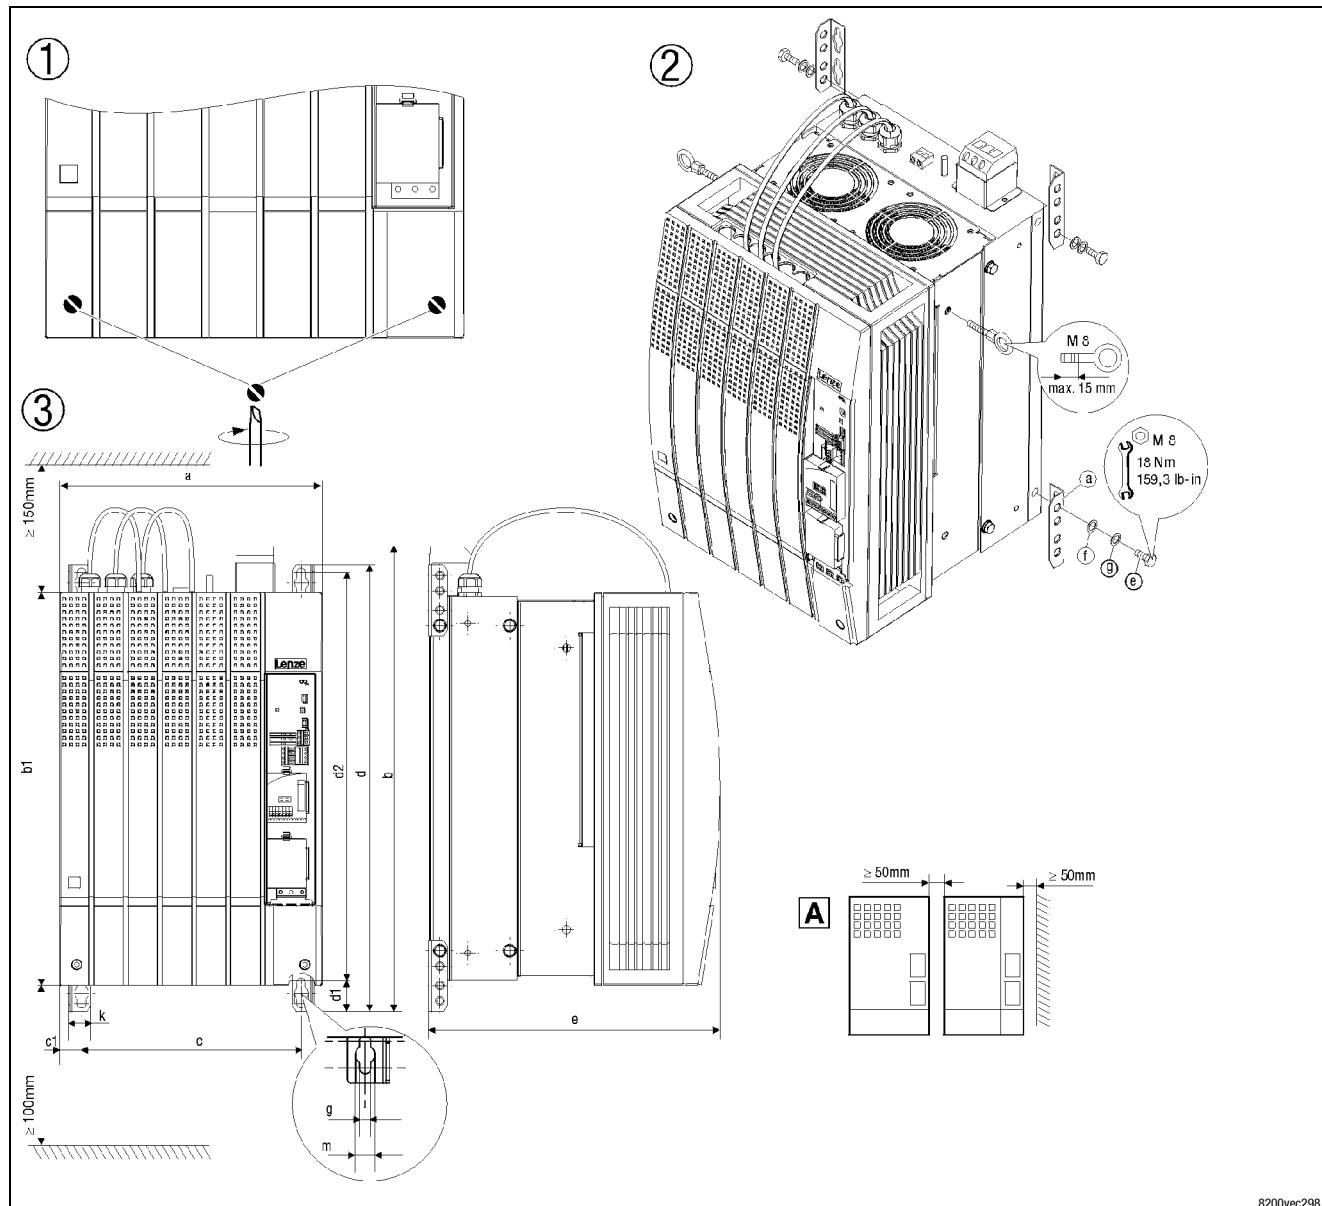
Standard mounting with footprint mains filter 45 ... 55 kW
